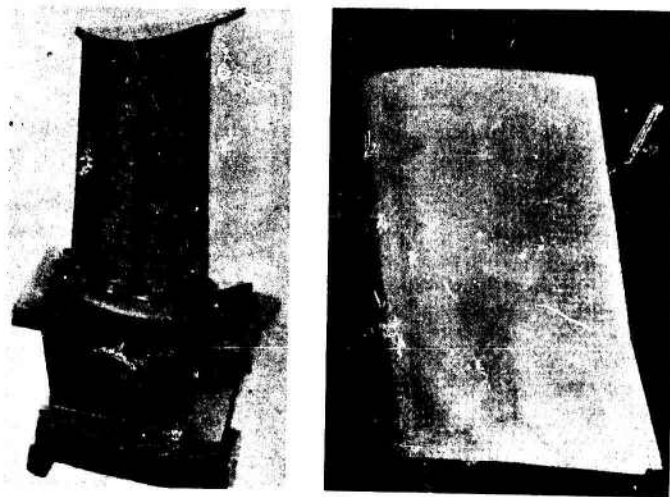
Cast Support Strut and Porous Shell Prior to Joining Assembly
